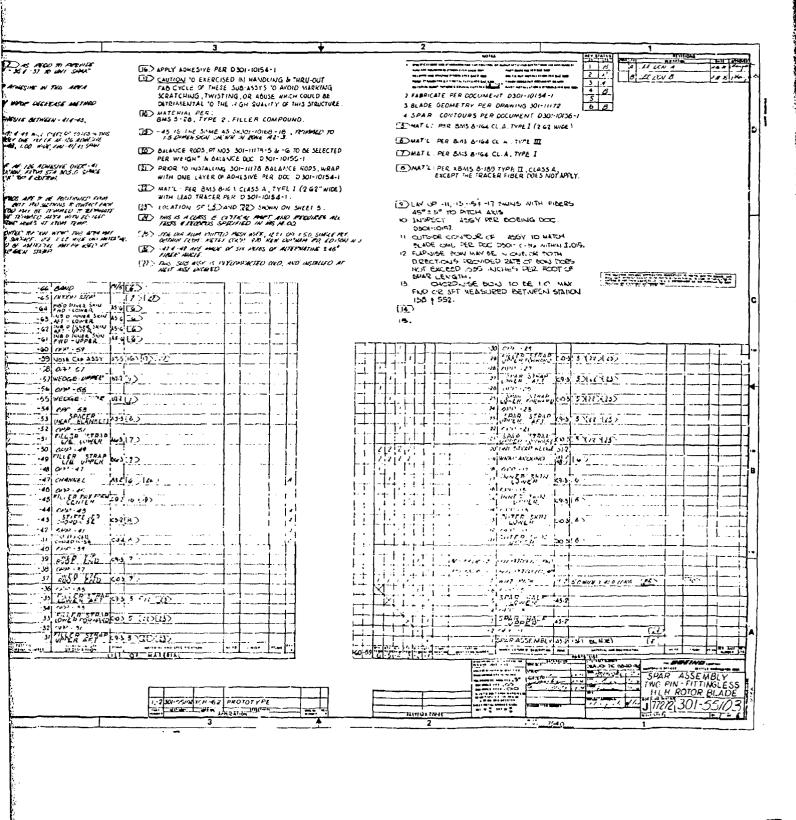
Spar Assembly Two-Pin, Fittingless HLH Rotor Blade
